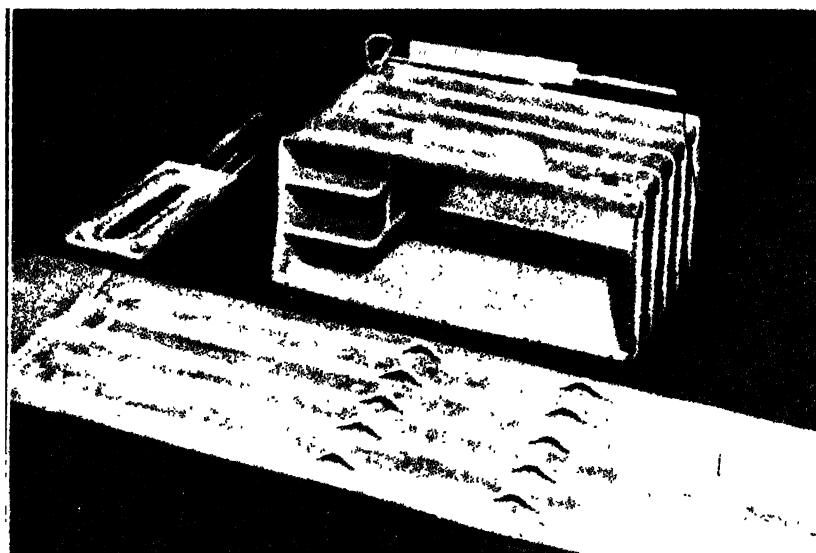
Below:* aluminum tubing 0.035 in. wall furnace brazed to aluminum sheet 0.036 in. thick. *Upper:* all-aluminum refrigerator evaporator made from brazed sheet and tube assembly. *Right:* separate braze shelf.
